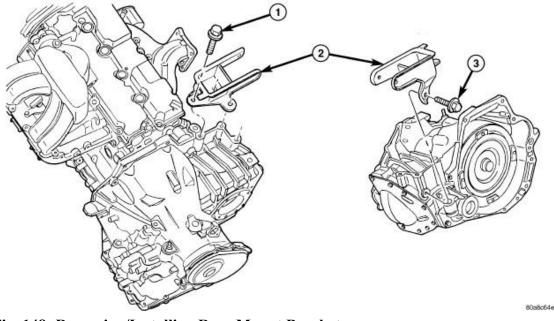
Removing/Installing Rear Mount Bracket Courtesy of CHRYSLER LLC
